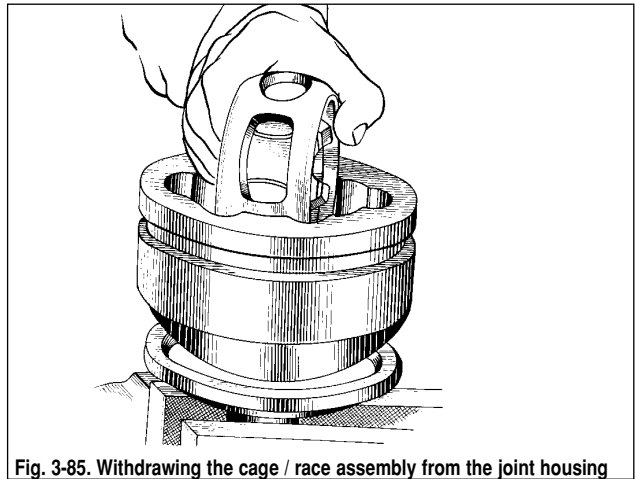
Withdrawing the cage / race assembly from the joint housing
